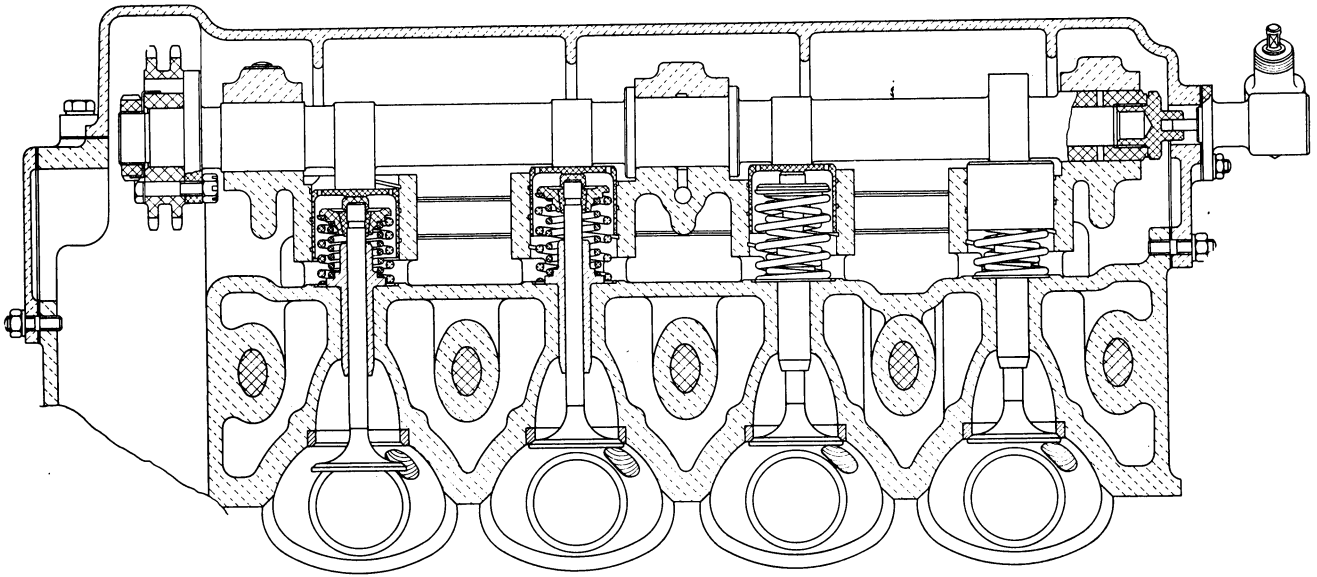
Sectional view of 118 B.000 engine head across intake valve camshaft and tachometer drive.
